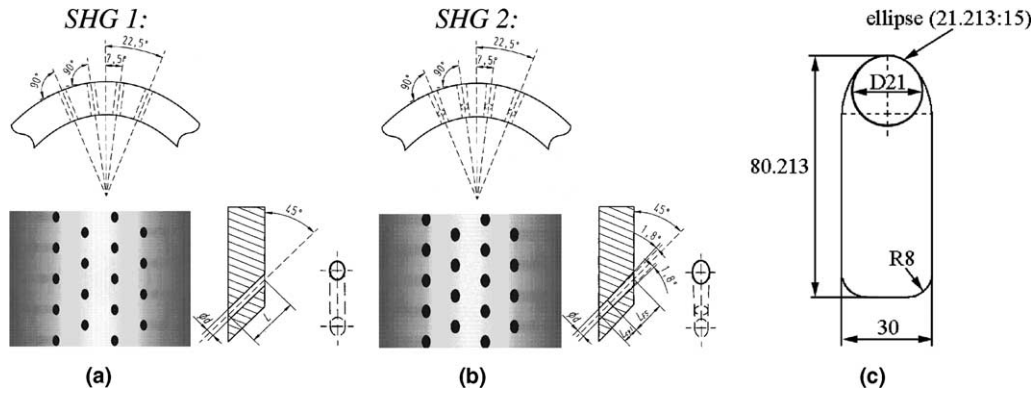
Geometrical data of the blunt body geometry (dimensions in [mm]) and the film cooling configurations. (a) Cylindrical holes, (b) Conical holes and (c) Blunt body.
